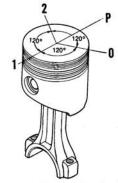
Position piston ring end gaps as shown around piston pin (P) centerline.
